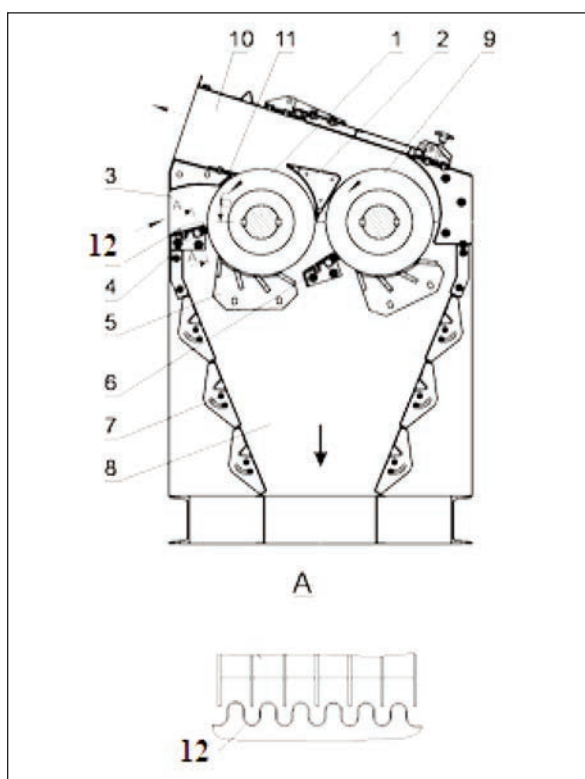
Fibre cleaner of special design with integrated guiding device: 1 – saw cylinder; 2 – separating knife; 3 – inlet pipe; 4, 6 – attachment brush; 5 – grate; 7 – blinds; 8 – mud hopper; 9 – outlet pipe; 10 – upper housing; 11 – garbage chamber; 12 – specially designed guide
